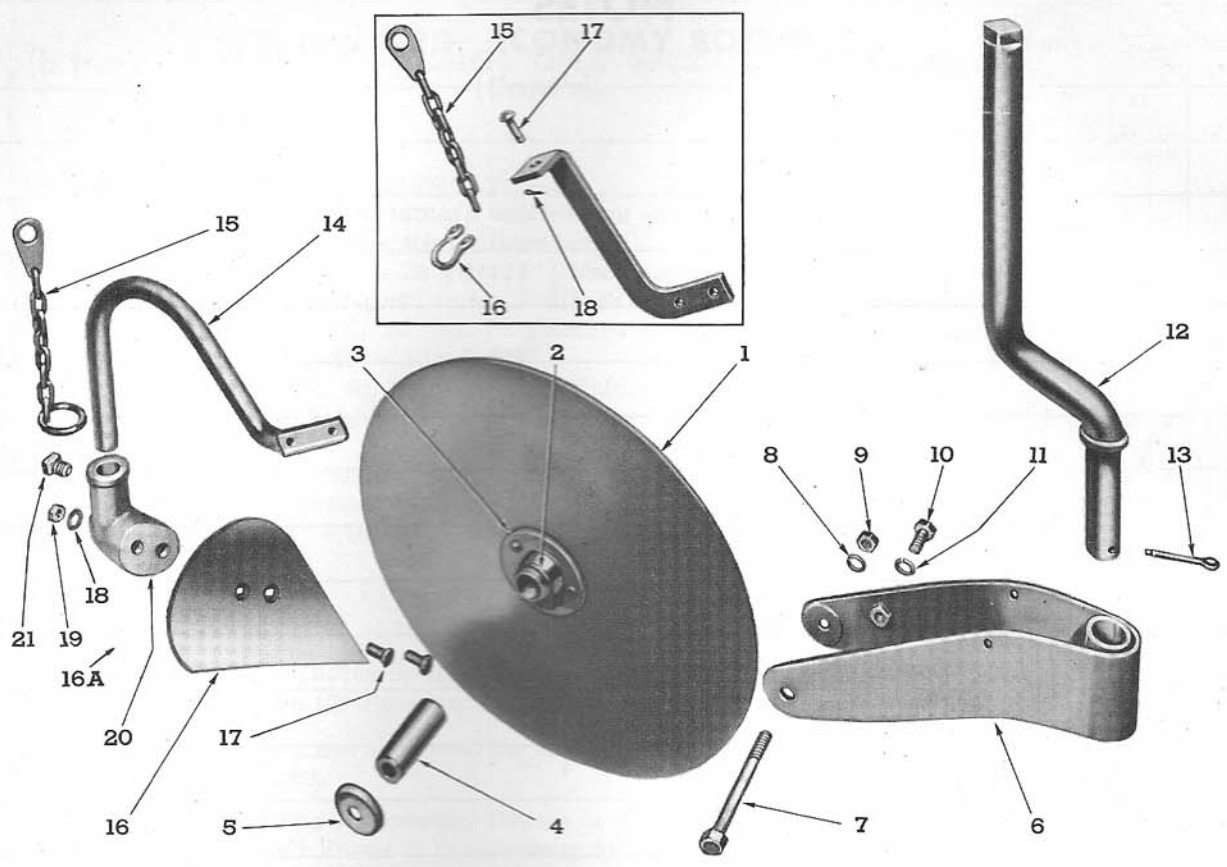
Coulter and Jointer Assembly (Prior Model)
